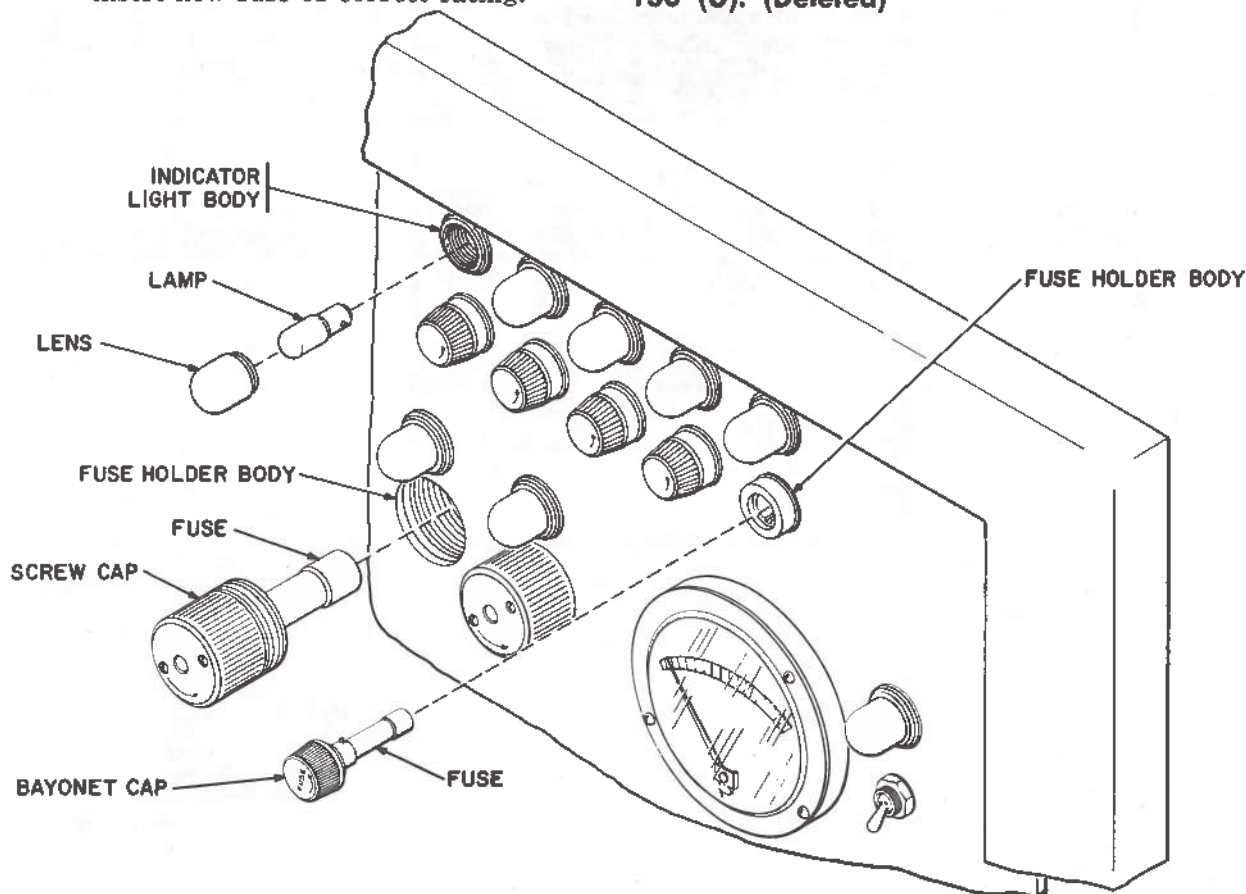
(U) Front panel lamps and fuses—typical exploded view. (U).
